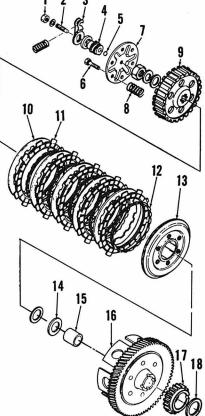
Exploded view of clutch assembly used in G6-S model. Unit used in other models is of similar construction.
